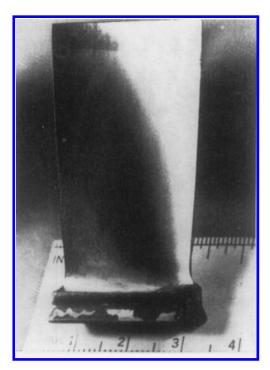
Photography showing a 17–4 PH stainless steel compressor blade coated with a tungsten carbide coating in a MTCVD process. The blade is first coated with an interlayer of nickel by electrolytic or electroless plating techniques to protect it from the corrosive action of hydrofluoric acid gas generated during the deposition reaction.
